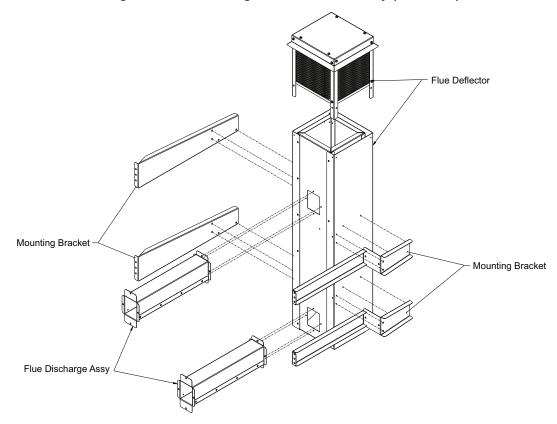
Flue Discharge Deflector Assembly (High Heat)
